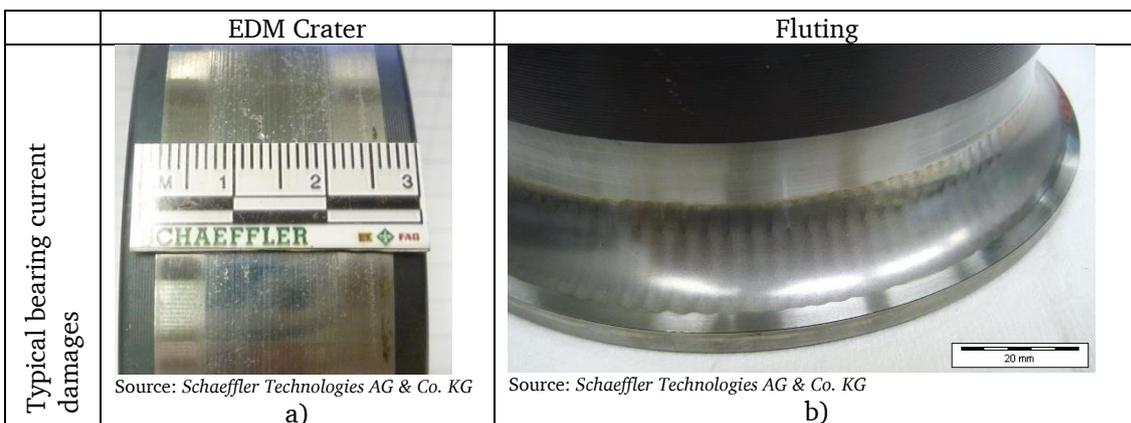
Typical bearing damages caused by bearing currents. Bearing grease consists of mineral oil and thickener.
